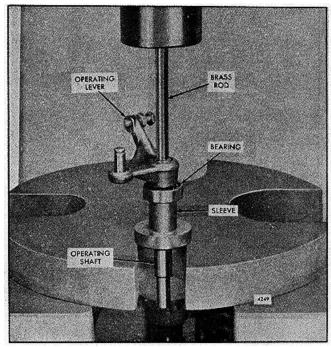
Removing Operating Lever and Upper Bearing from Operating Shaft
